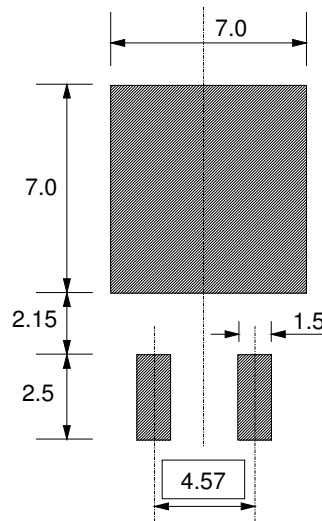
SOT428 : minimum pad sizes for surface mounting.
